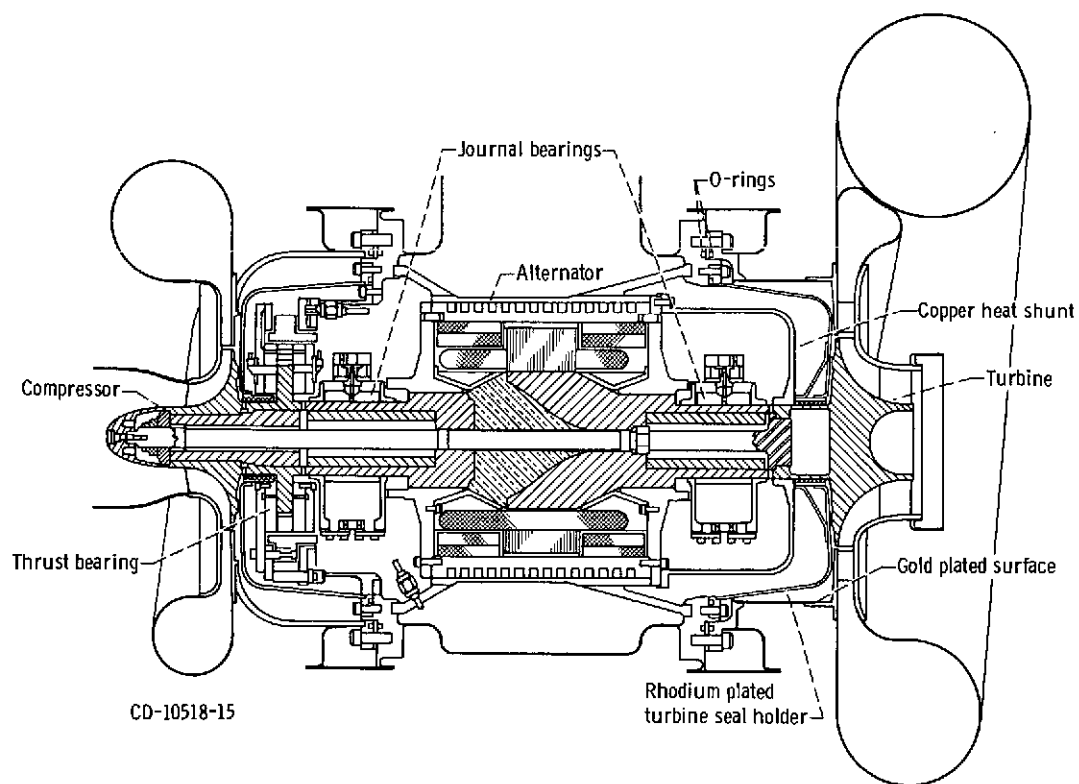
Schematic Drawing of Brayton Cycle Turbo Alternator-Compressor Unit
